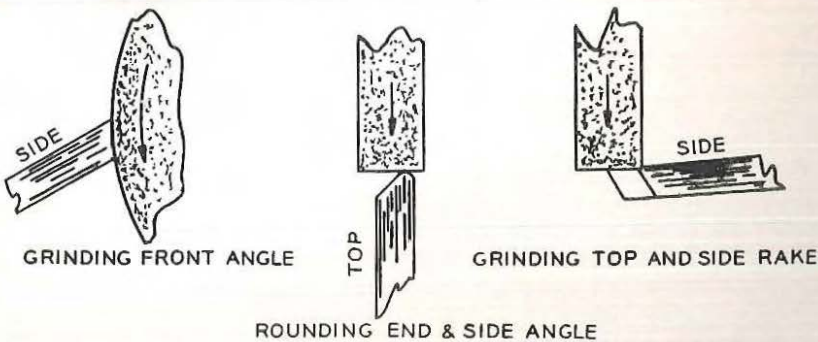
Three views of the process of grinding a R. H. turning tool bit.
